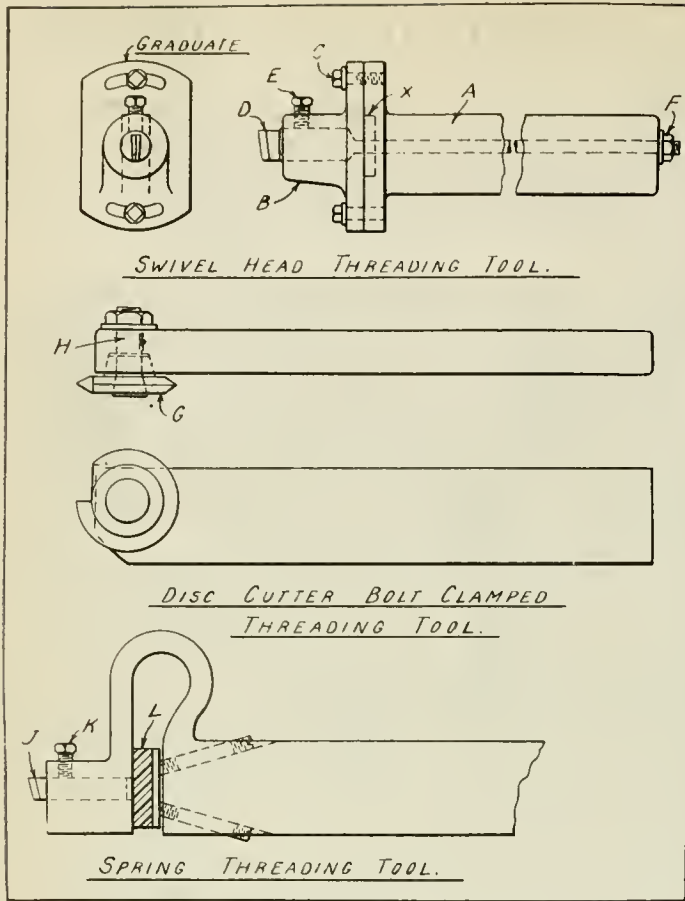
SWIVEL DISC AND SPRING THREADING TOOLS OF TYPICAL DESIGN.
